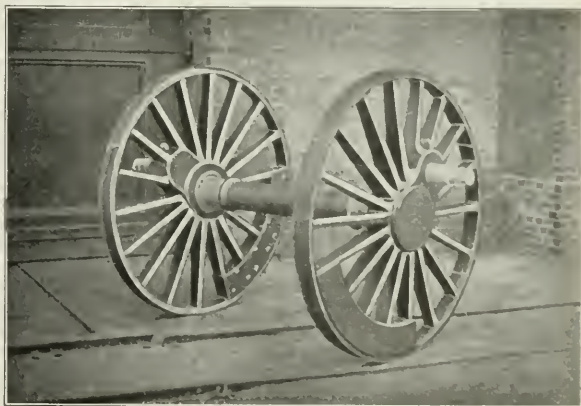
BROKEN DRIVING WHEEL (SHOWING CRACKS)
